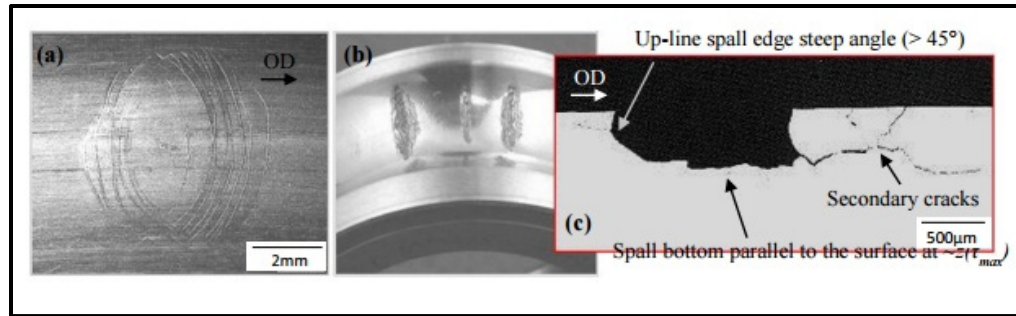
Subsurface of bearing contact fatigue of roller contact, (Crehu, 2015): a) Bearing cracks at surface; b) spalling at bearing surface; c) Spall bottom parallel to surface. OD: Over-rolling direction
